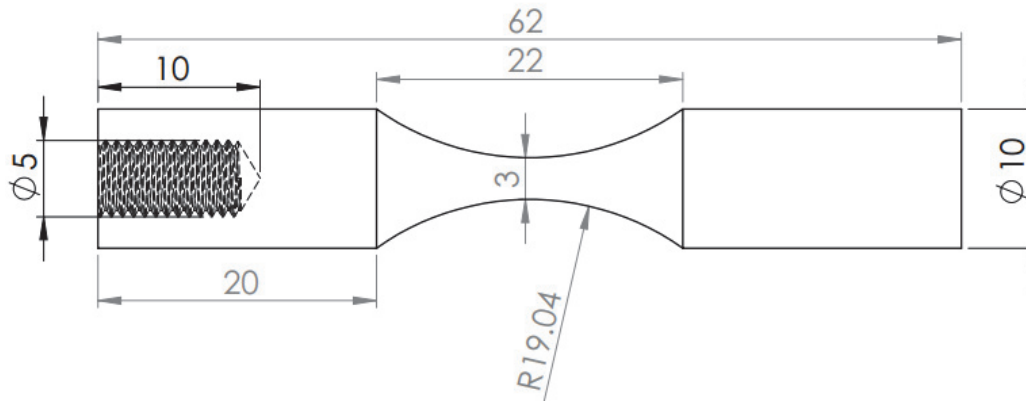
Final dimensions (mm), of ultrasonic fatigue specimen for AISI 304 and 316 stainless steels.
